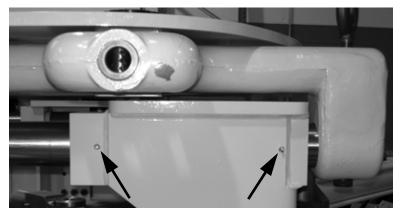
Grease fittings for the frame guide shaft on the open side of the frame.
